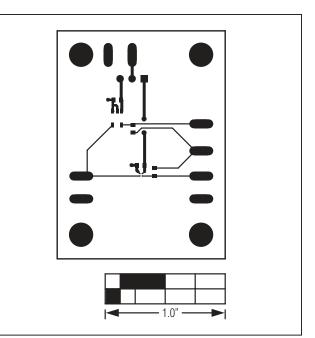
MAX9644/MAX9645/MAX9646 EV Kit PCB Layout— Component Side
